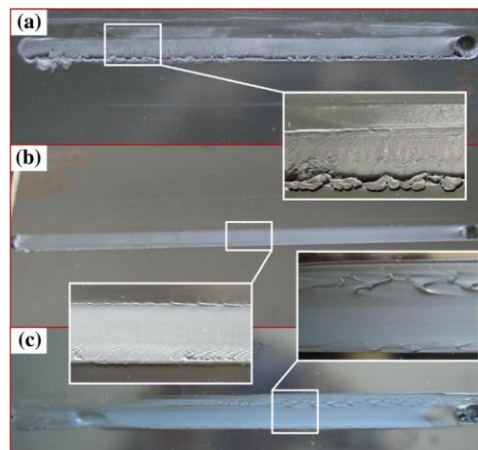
Surface finish of welds produced with hot shoe temperatures of: (a) 90°C, (b) 115°C and (c) 130°C [45].
